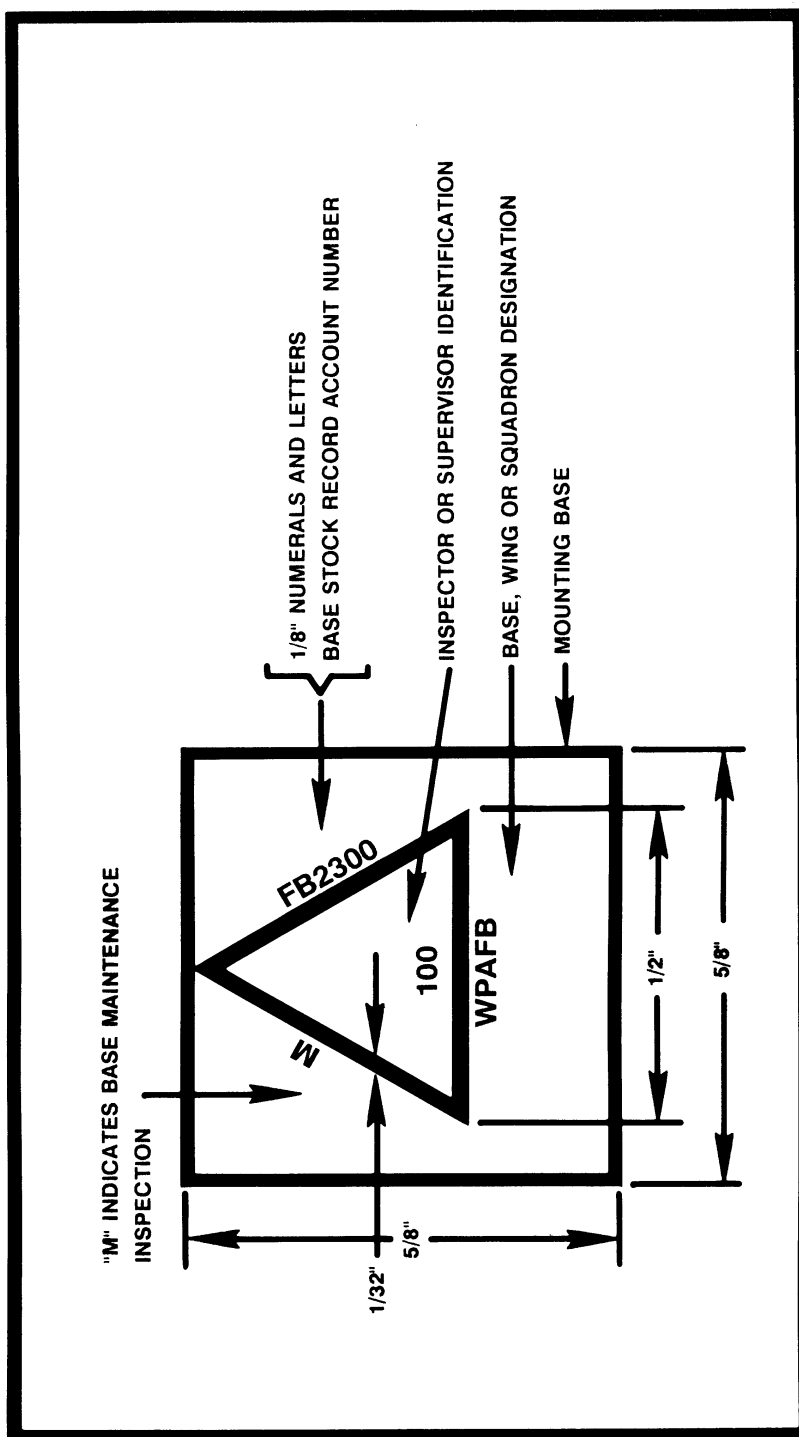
Sample Enlarged Illustration of Base Level Inspection Stamp
